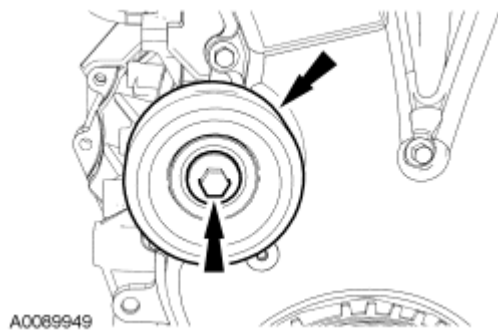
Locating Accessory Drivebelt Idler Pulley And Bolt
